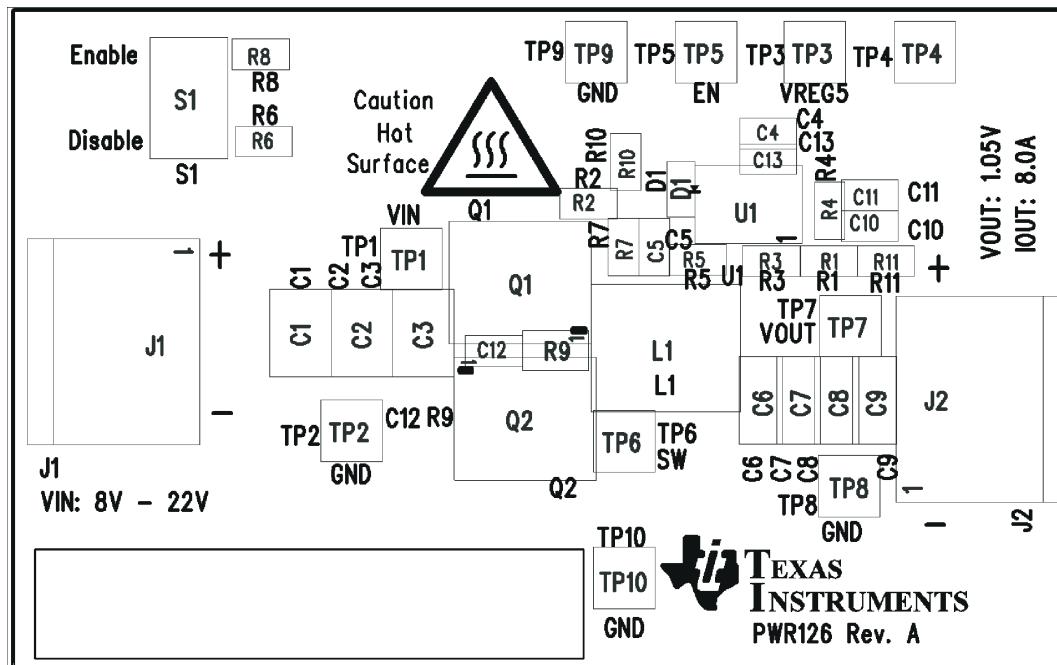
TPS53015EVM-126 Top Layer Assembly Drawing (Top View)
